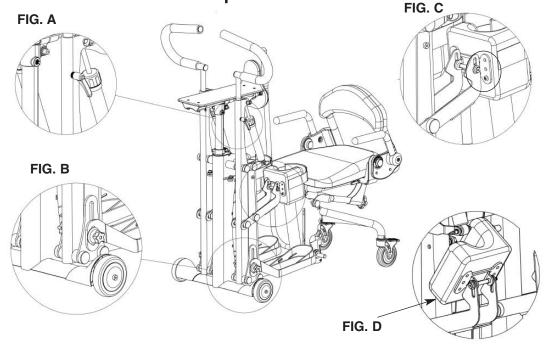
FIG. A- To adjust the height of the glide handles, loosen each clamp. Adjust the handles to the user's desired position and tighten the clamps.
